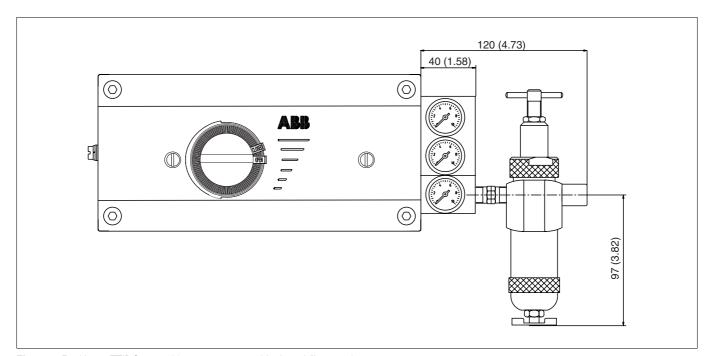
Positioner TZIDC-200 with pressure gauge block and filter regulator
